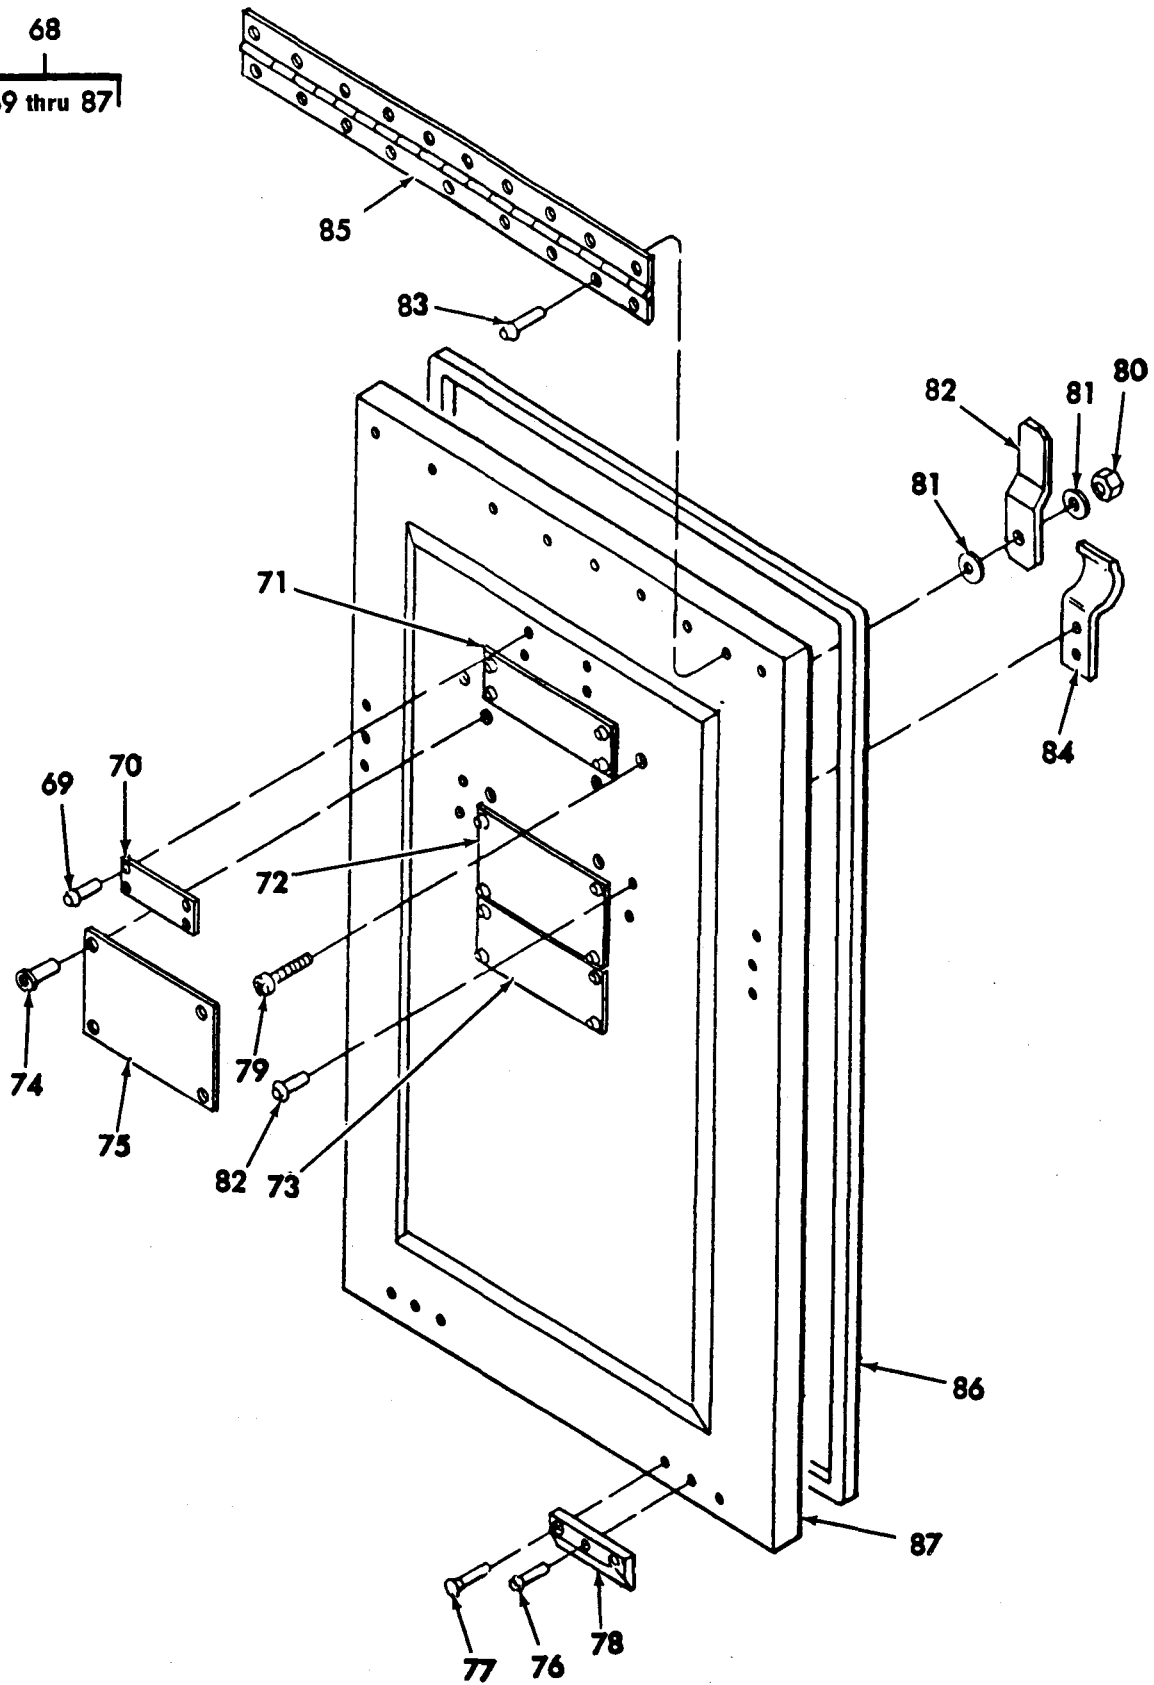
Inner Door Assembly (Sheet 4 of 4)
